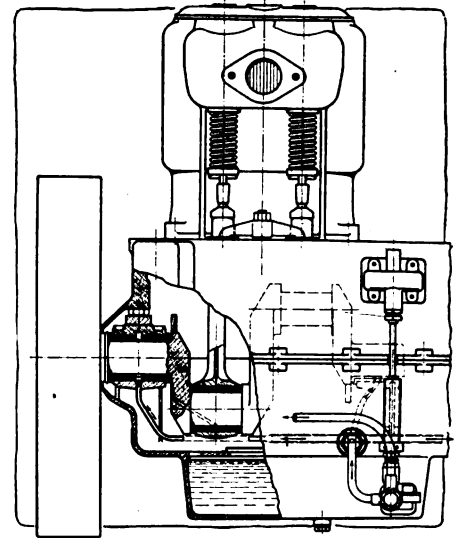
A—Side view partly in section, showing oiling system, of NAG motor
